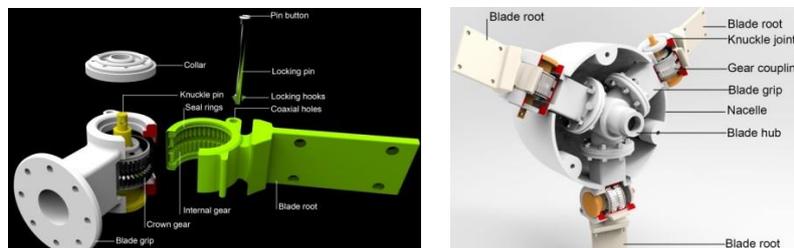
Folding and retracting mechanism of knuckle joint with gear coupling
